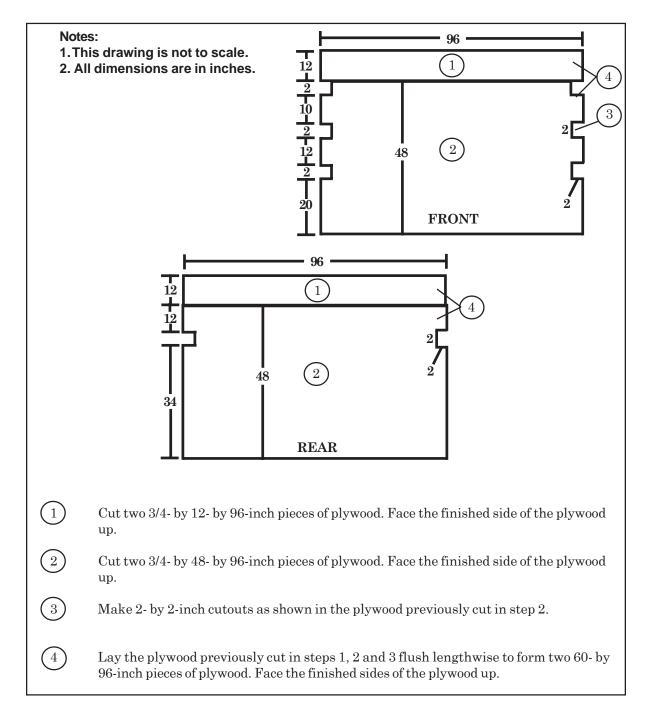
Equipment Box 1 Front and Rear Constructed
